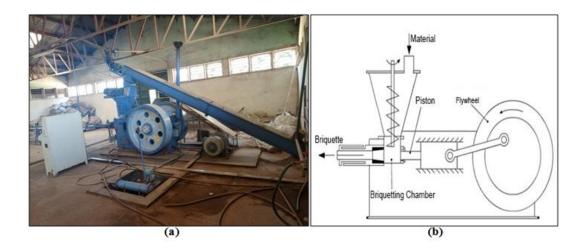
4: Machine Used; (a) Piston-Type Briquetting Machine and (b) Piston-Type Machine Diagram
